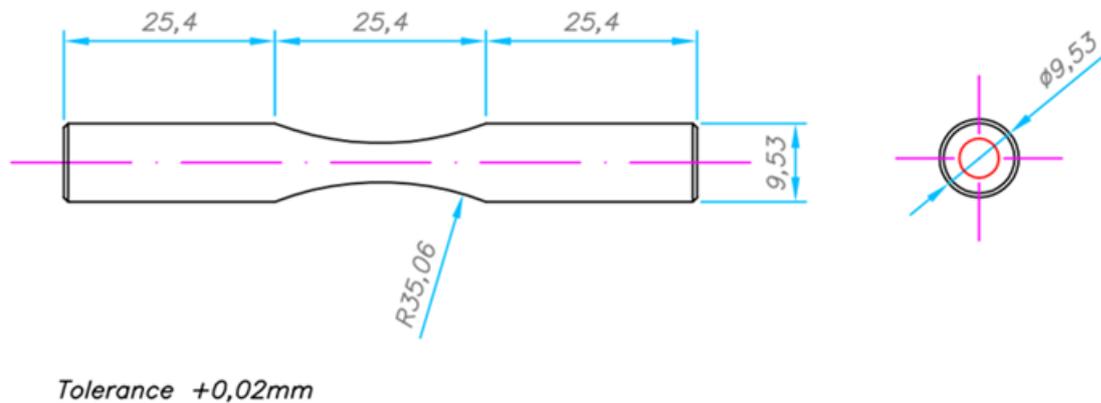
Technical design of the test specimen for rotating fatigue test (mm).
